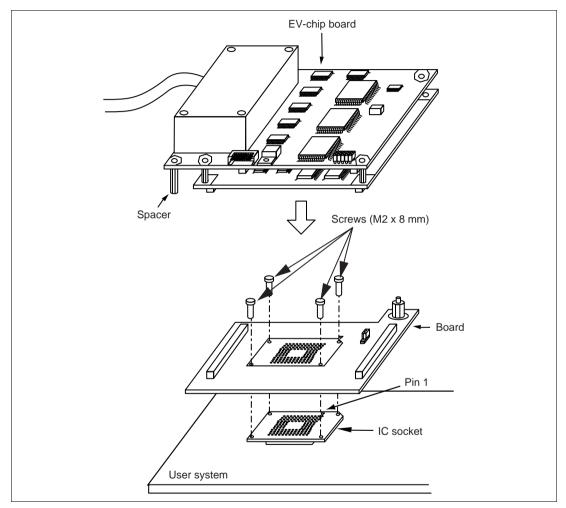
User System Interface Board for the SH7058 BP-272 Package
